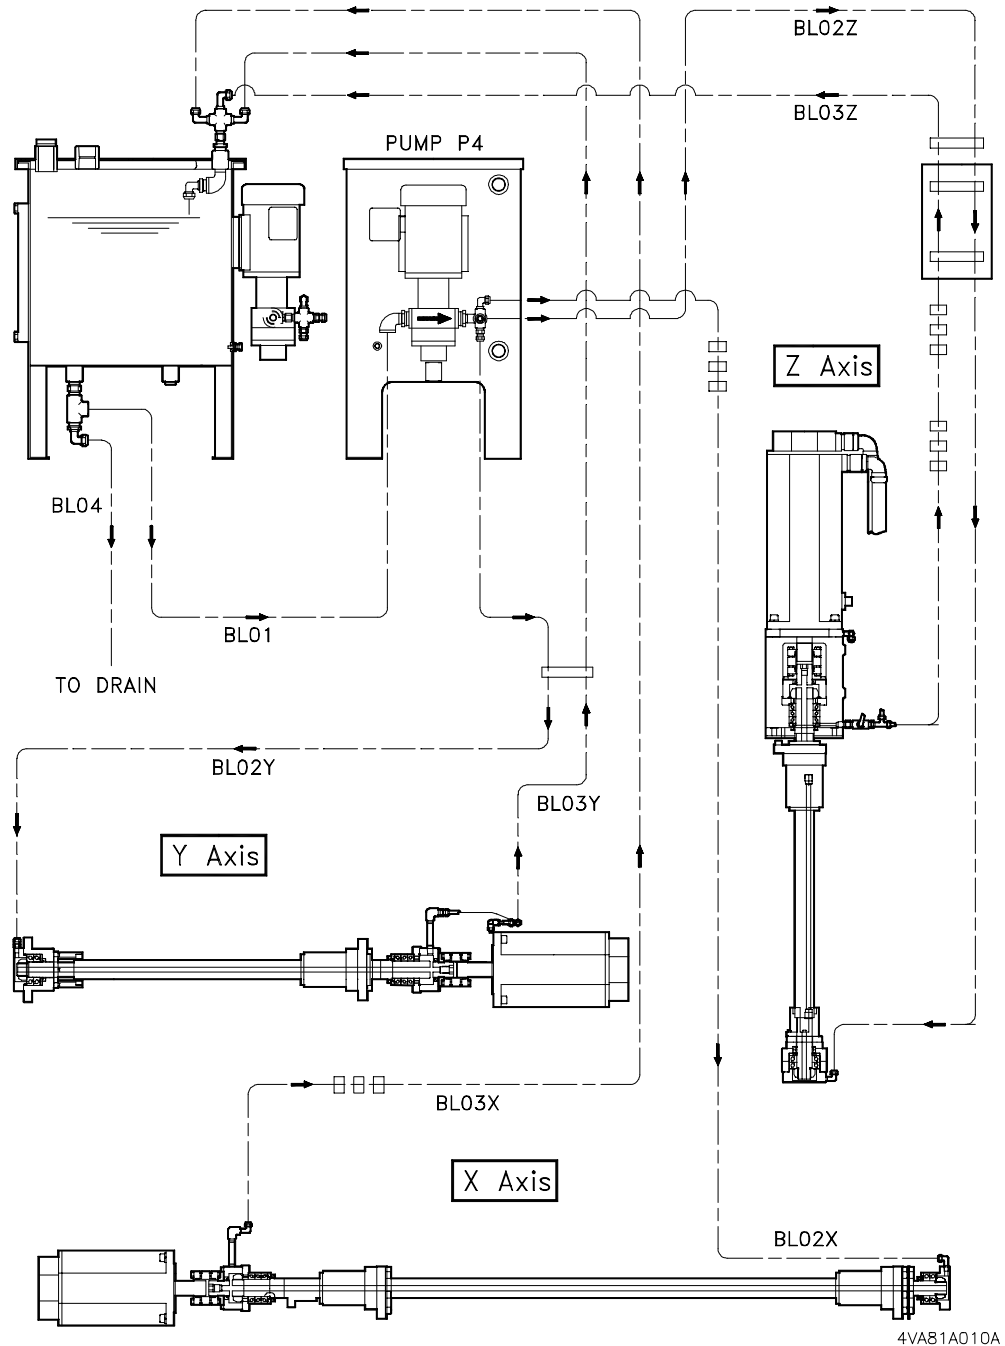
BALL SCREW COOLING OIL AND TAC BEARING LUBRICATION PIPING
